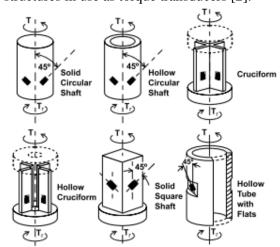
Typical sections of torque sensor shaft [2]. In this paper, we focus on a practical torque measurement method based on the
